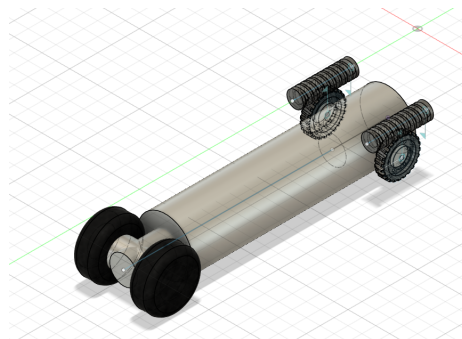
Landing Gear (with worm gear) Fully Retracted Isometric View
